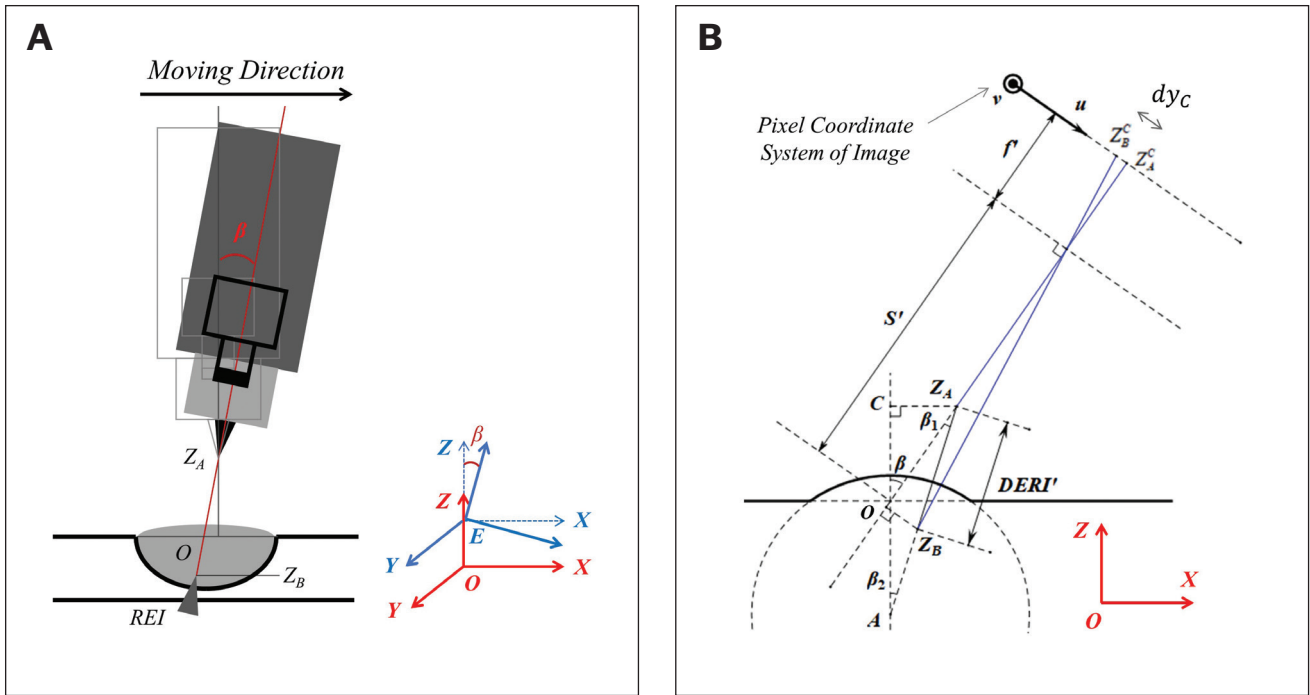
A – The position and attitude of TCS relative to WPCS when deflection occurs in the Y-axis; B – schematic of camera, weld pool, and welding torch projected in XOZ plane.
